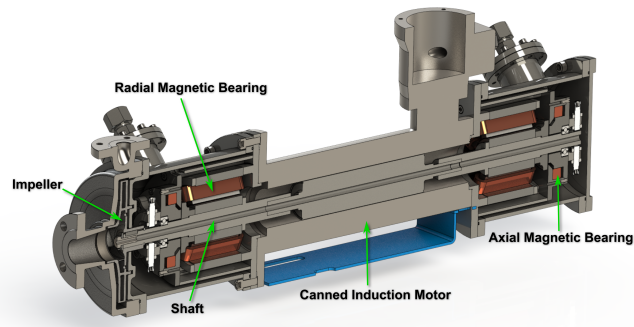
3D Model of the modified Teikoku 204TF1 pump magnetic bearing testbed.
